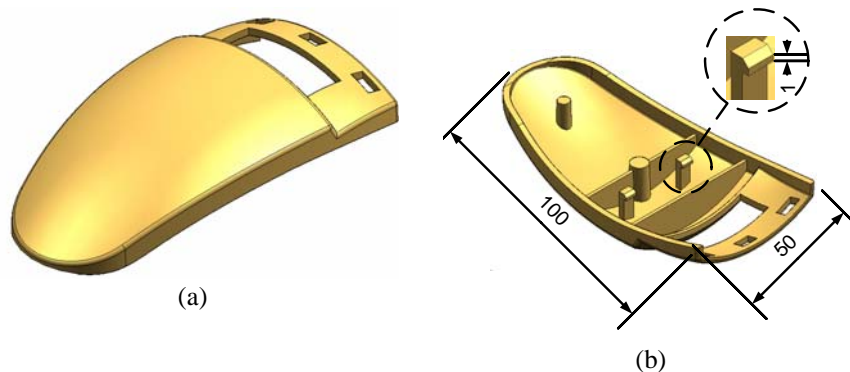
Mouse case geometry - part 2. External side (a) and internal side (b)
